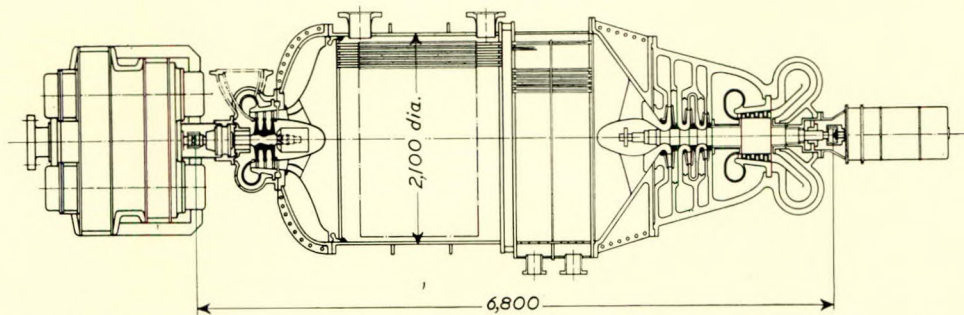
Cross section of turbomachine set and heat exchanger apparatus for a 10,000-s.h.p. marine plant. The components shown, from left to right, are: gear set, power turbine, recuperator heat exchanger, precooler, radial compressor group, high pressure turbine, and starting motor generator. Dimensions are in millimetres
